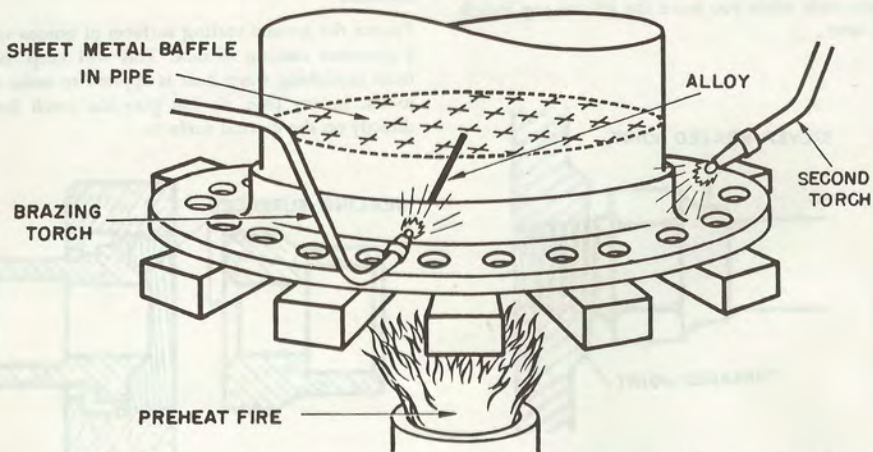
This is the kind of setup you need for silver brazing large flanges.
